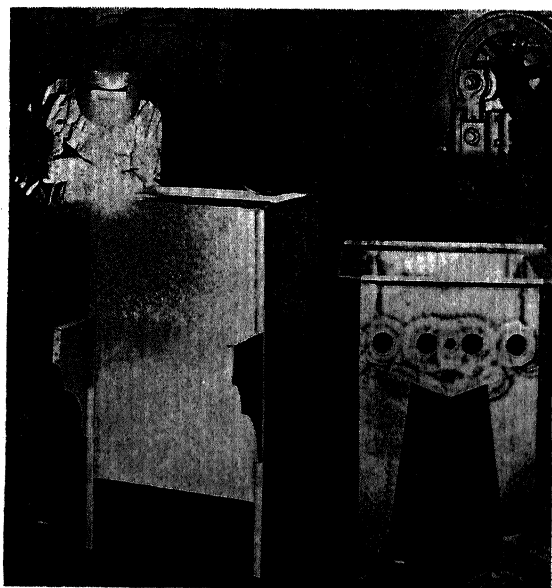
Fabricating stainless steel cabinet for beer drawing equipment by arc welding.
